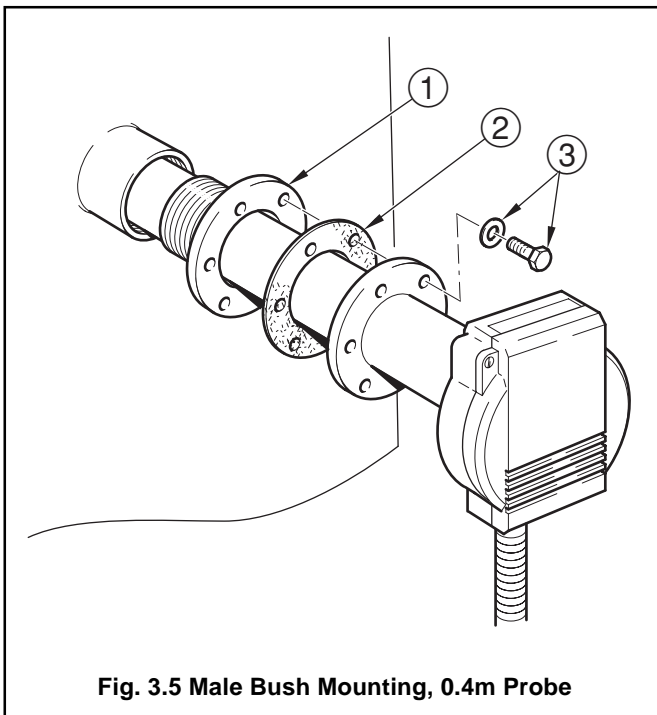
Male Bush Mounting, 0.4m Probe
